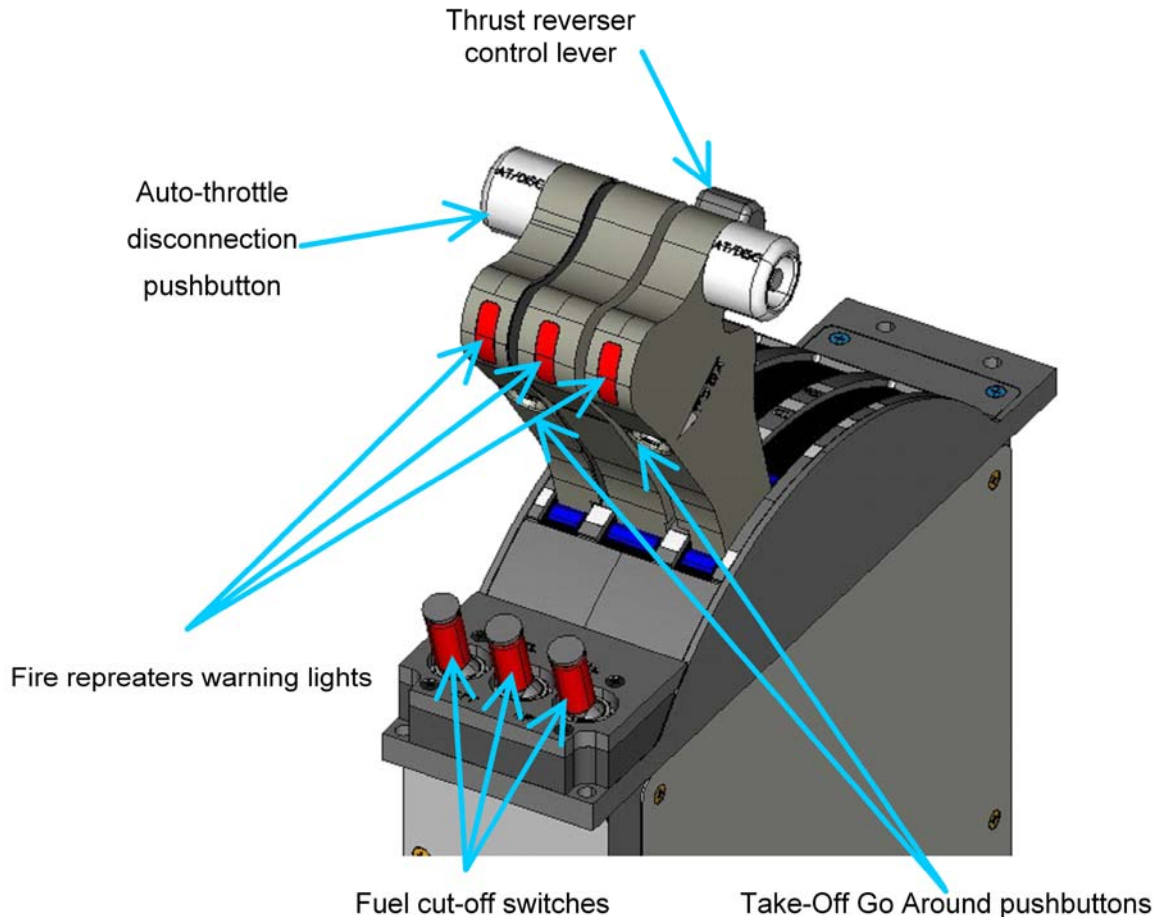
PEDESTAL ENGINE START SELECTOR AND THROTTLE CONTROLS
